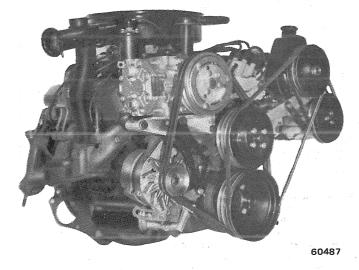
B-100 Typical Eight-Cylinder Engine Assembly
